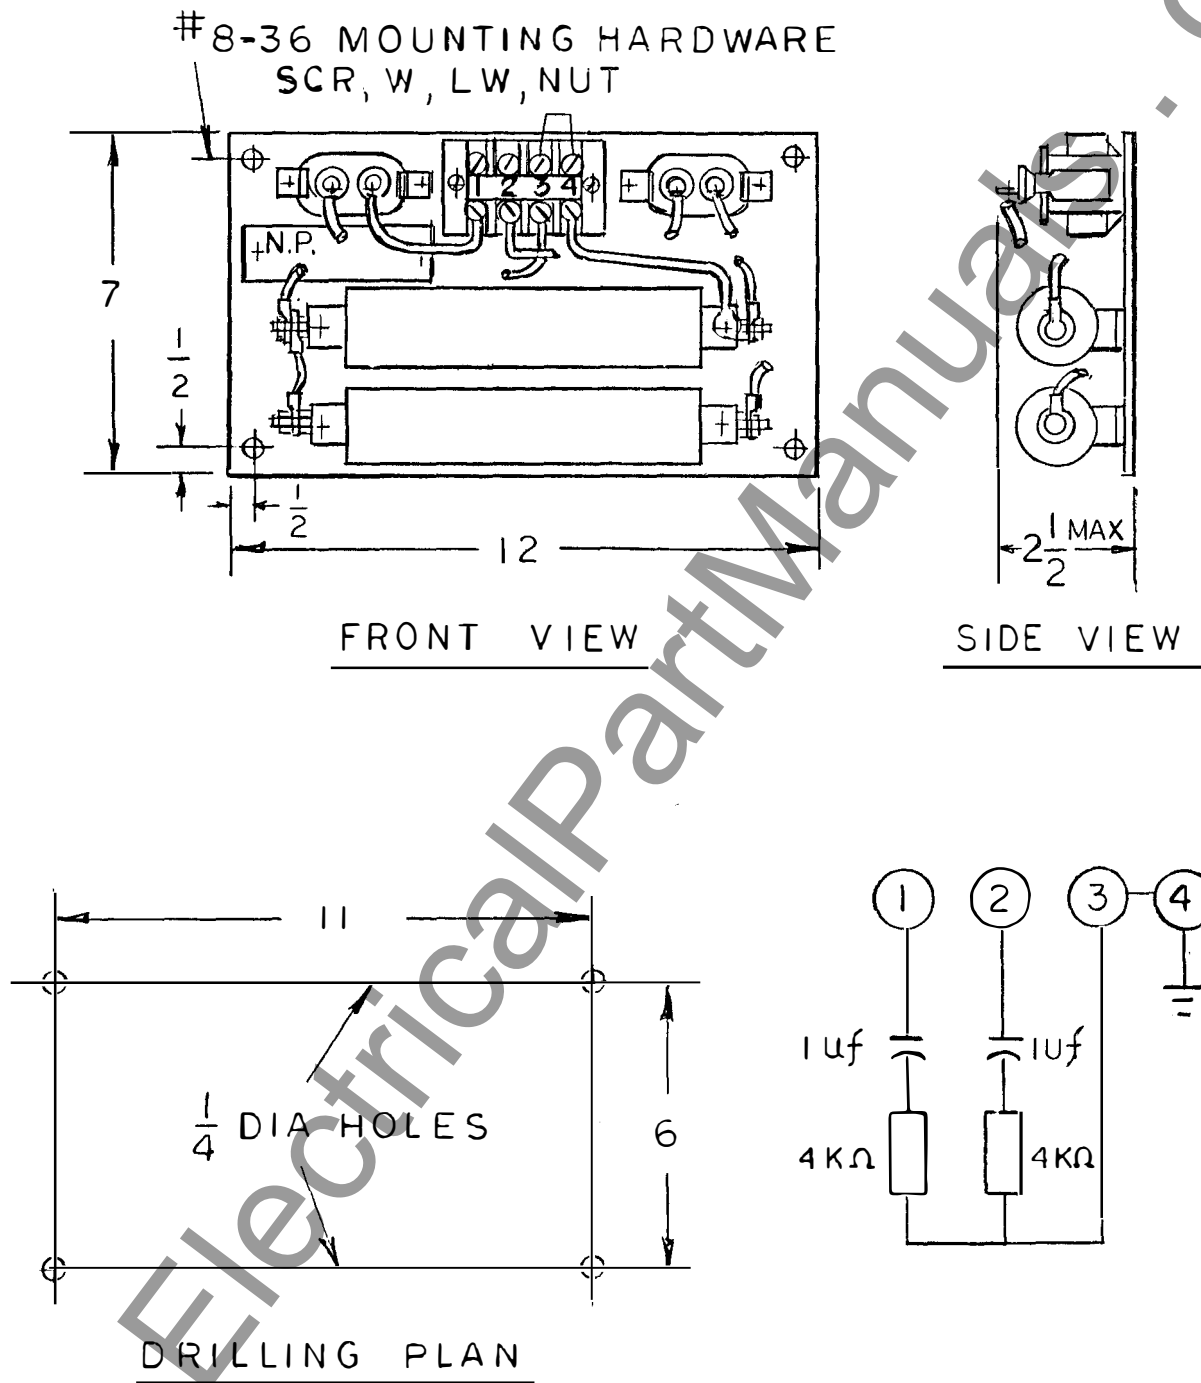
(0273A9067 [1]) Outline, Panel-Drilling Dimensions and Electrical Connections Diagram for External Neutralizing Transformer Exciting Package
